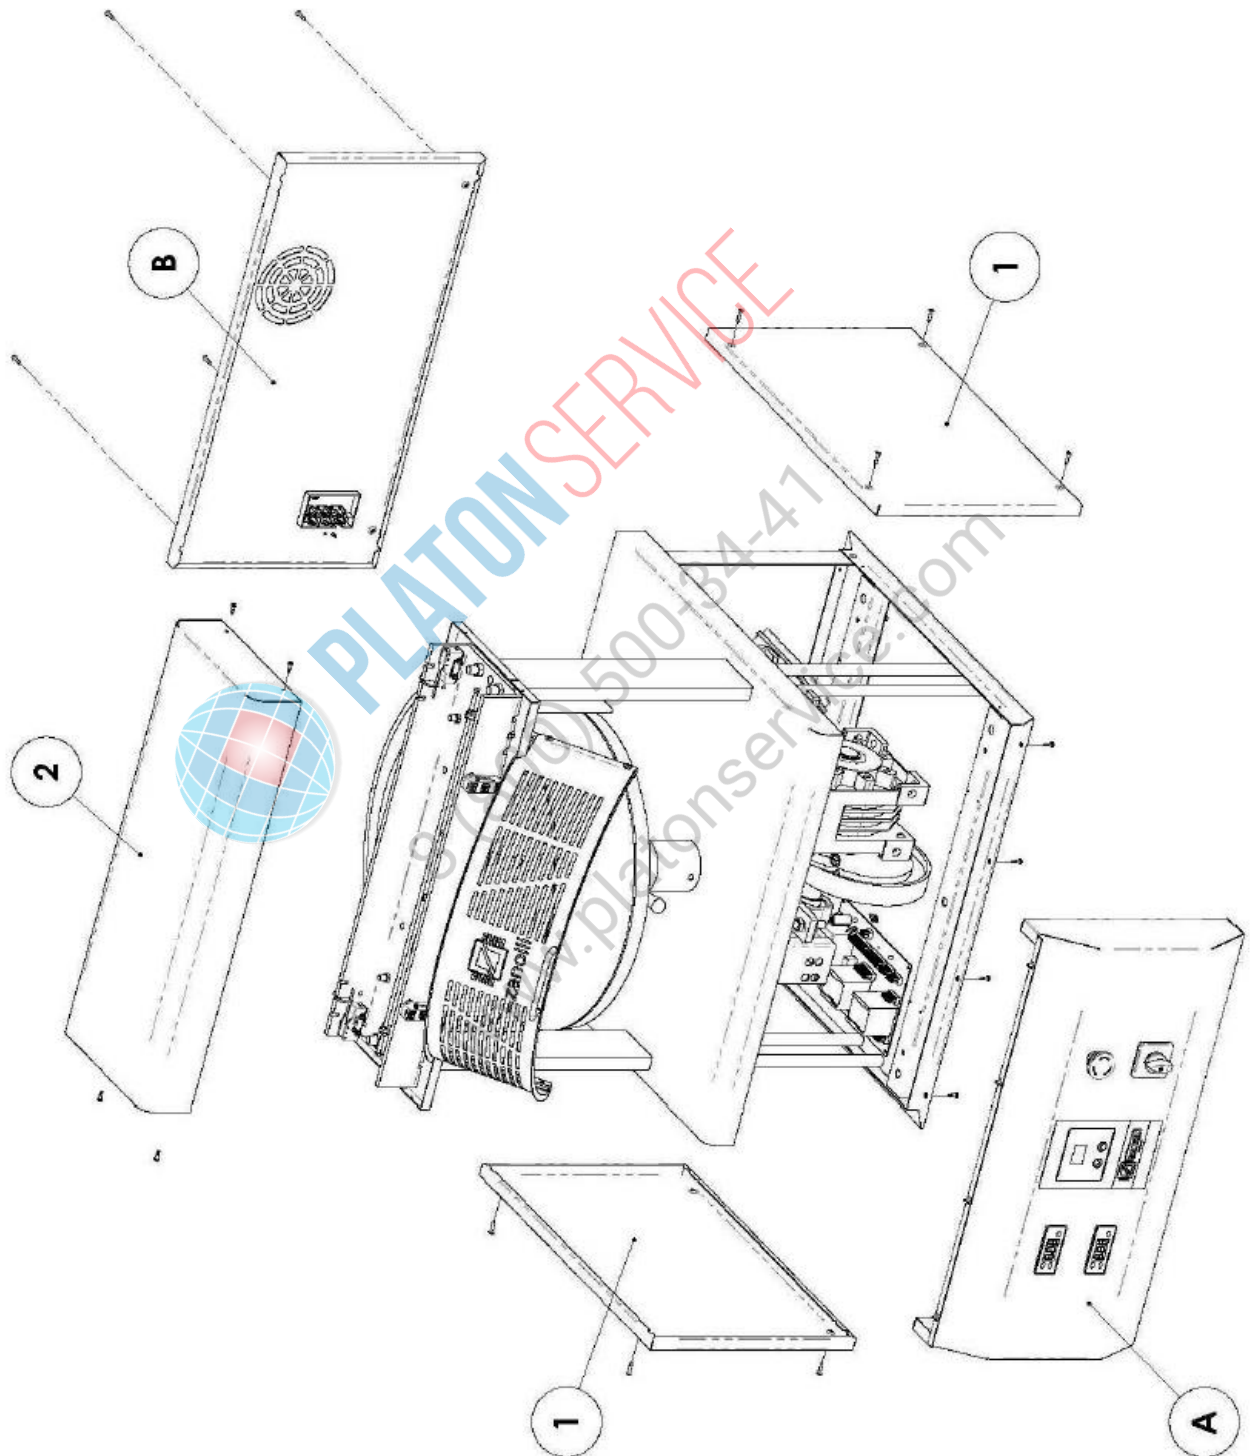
DEVIL 33 / DEVIL 45 – exploded view
